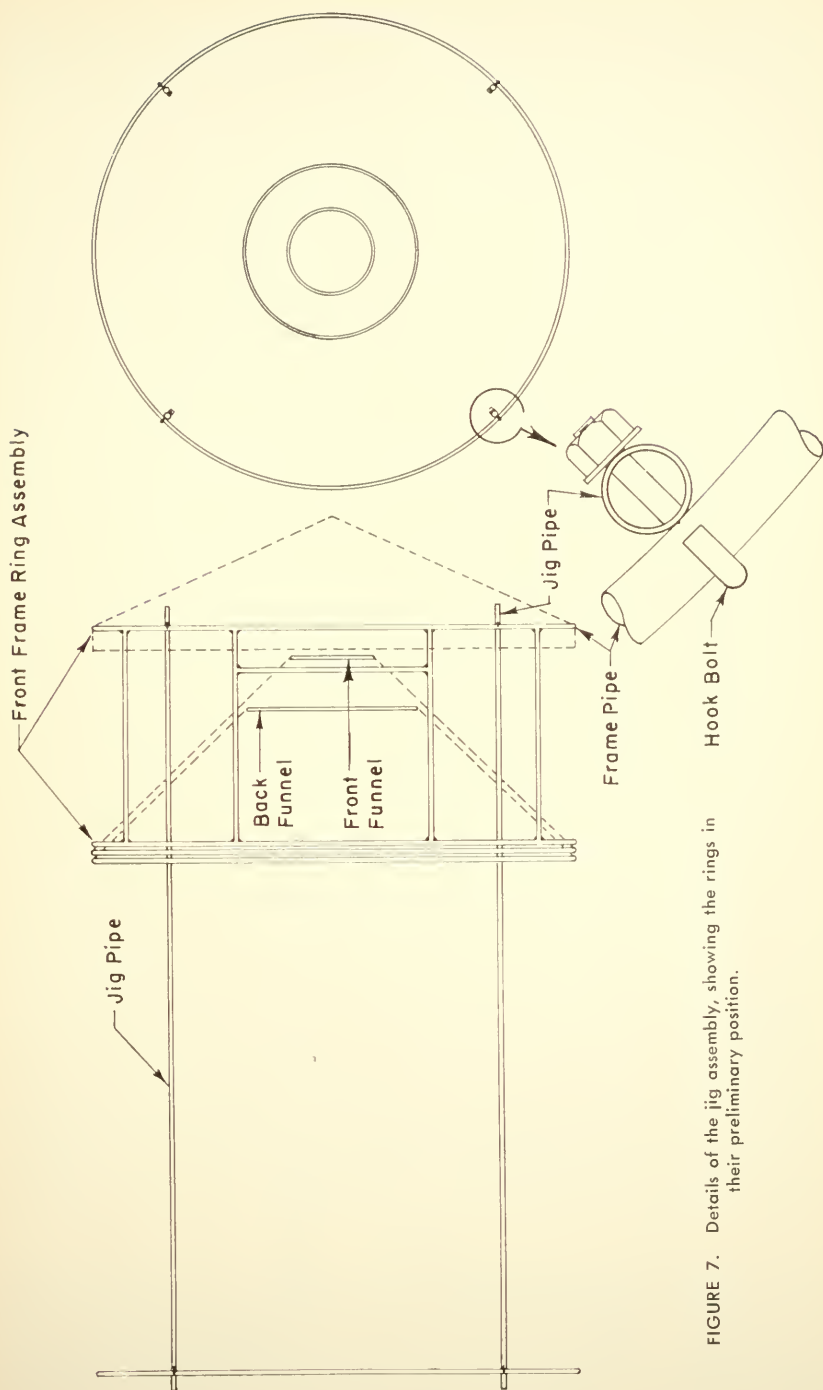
Details of the jig assembly, showing the rings in their preliminary position.
